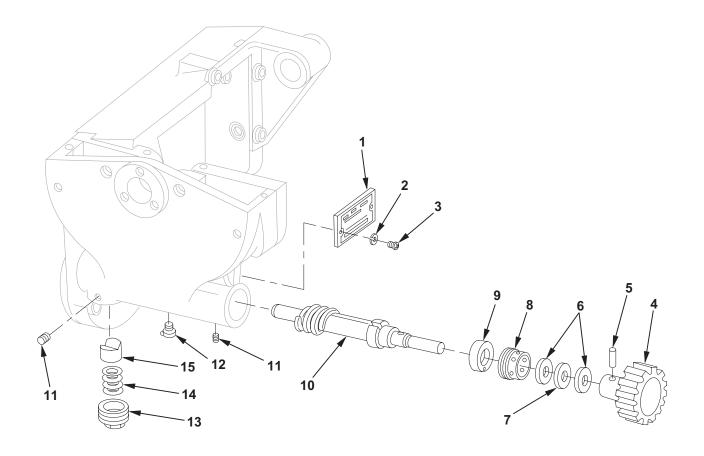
M172 Telescope and Quadrant Mount, 10554823, and M172A1 Telescope and Quadrant Mount, 13005089, Parts (Lower Right).
